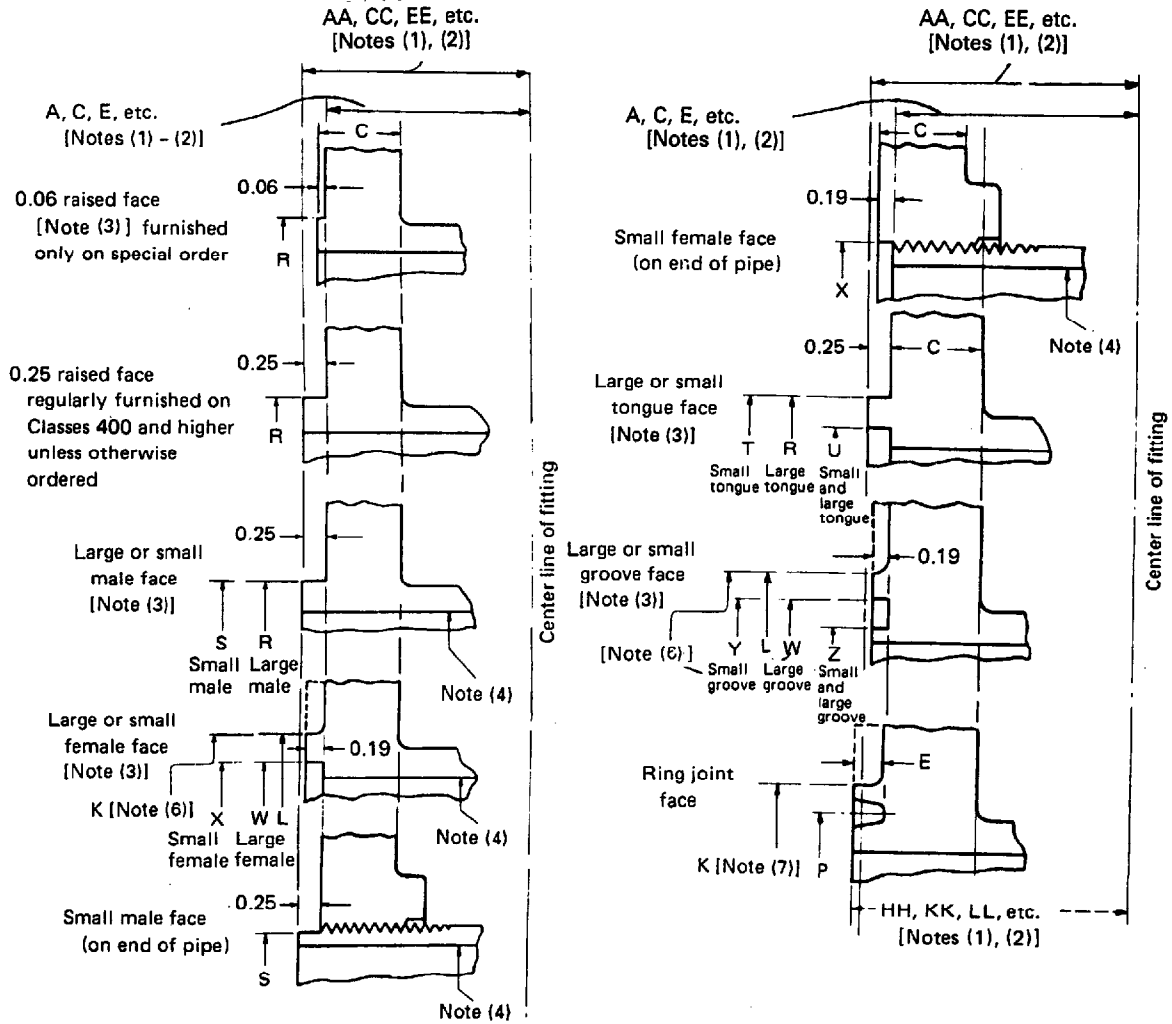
END FLANGE FACINGS AND THEIR RELATIONSHIP TO FLANGE THICKNESS AND CENTER-TO-END AND END-TO-END DIMENSIONS^{1,3} (CONT'D)
